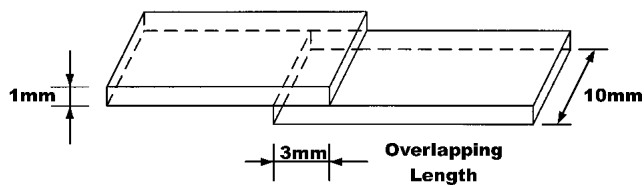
Geometry and dimensions of the brazed specimens for tensile testing
